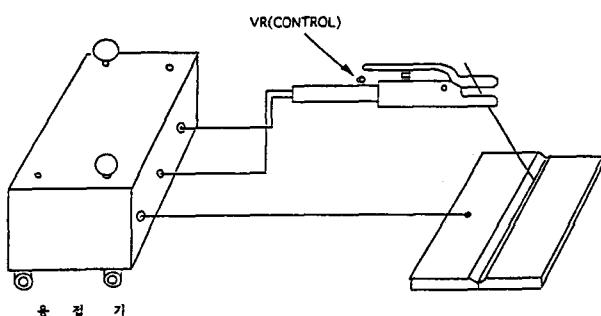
Metal arc welding machine applied holder ampere control system
